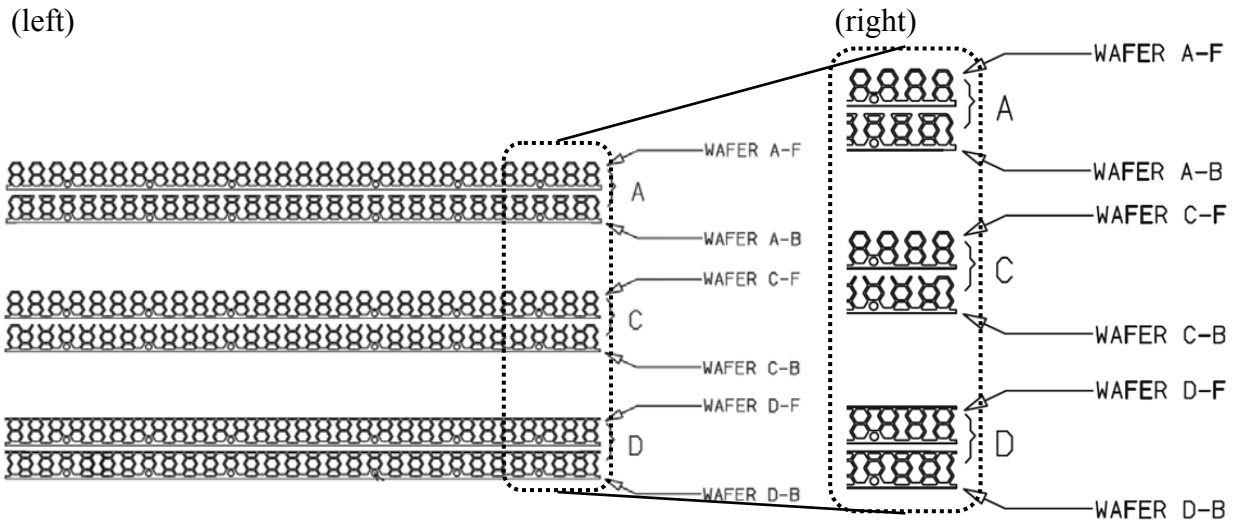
(left) Sample slotted honeycomb heat sink designs A, C and D depicting the two wafer layers "F" and "B" for each design; and (right) expanded view of designs.
